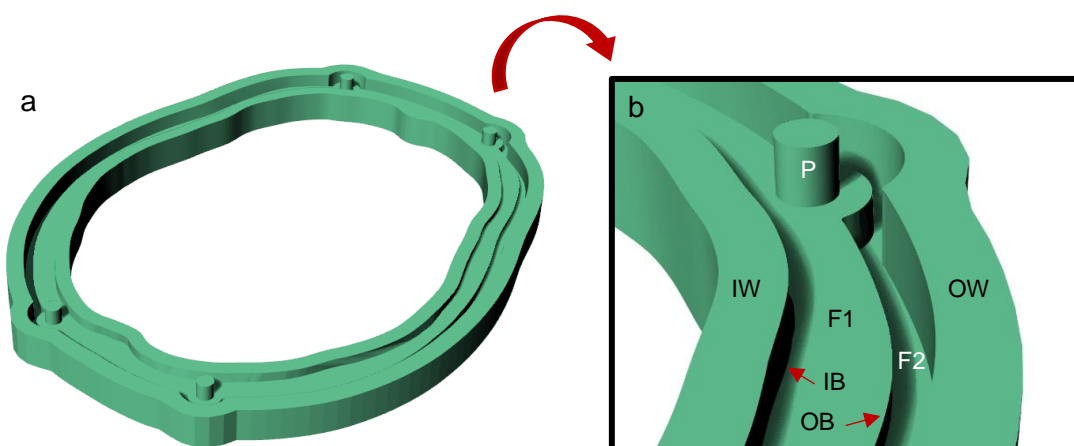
Mould for the fabrication of the silicone gasket. a) entire gasket mould; b) zoomed in view of mould cavity showing inner boundary (IB) of split surface, outer boundary of split surface, floor 1 of the mould (F1), floor 2 of the mould (F2), a pillar (P), inner wall (IW) and outer wall (OW).
